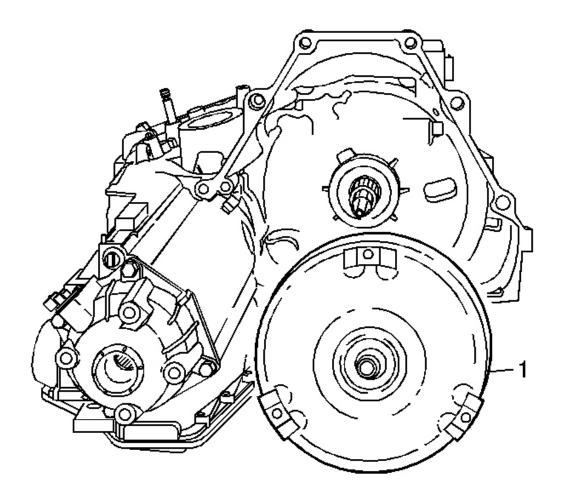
View Of Torque Converter Assembly Courtesy of GENERAL MOTORS CORP.
